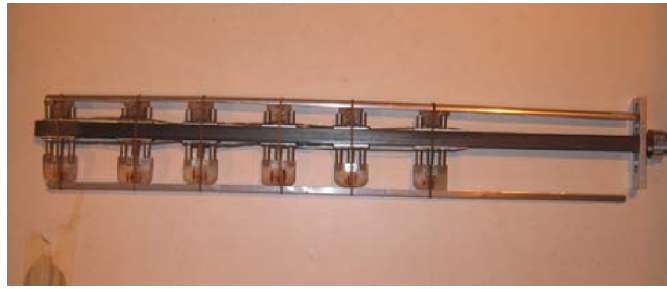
Complete assembly of the final span/chord morphing wing mechanism prototype [31].
